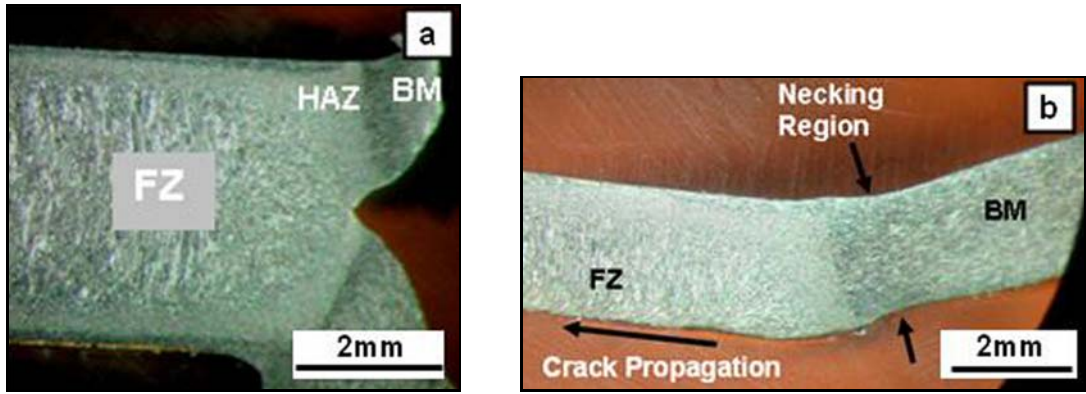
a) A typical fracture cross section macrograph of a spot weld which is failed via pullout failure mode; b) Fracture cross section of a spot weld which is failed in the interfacial failure mode; necking is initiated in the base metal region, however, before its propagation in through-thickness direction, experienced shear stress at weld interface reaches its critical value at the weld interface. Consequently, spot weld failed in the interfacial mode.
